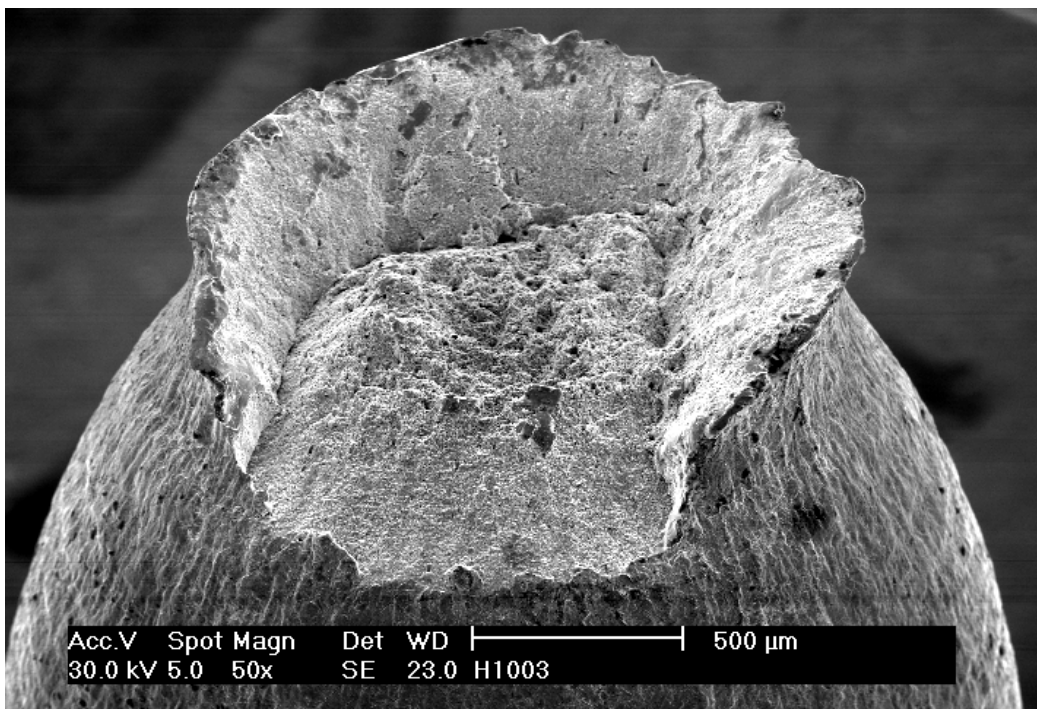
Tensile sample H1003, $\varnothing = 3 \text{ mm}$, strain rate = 200 s^{-1} ; the fracture surface.
